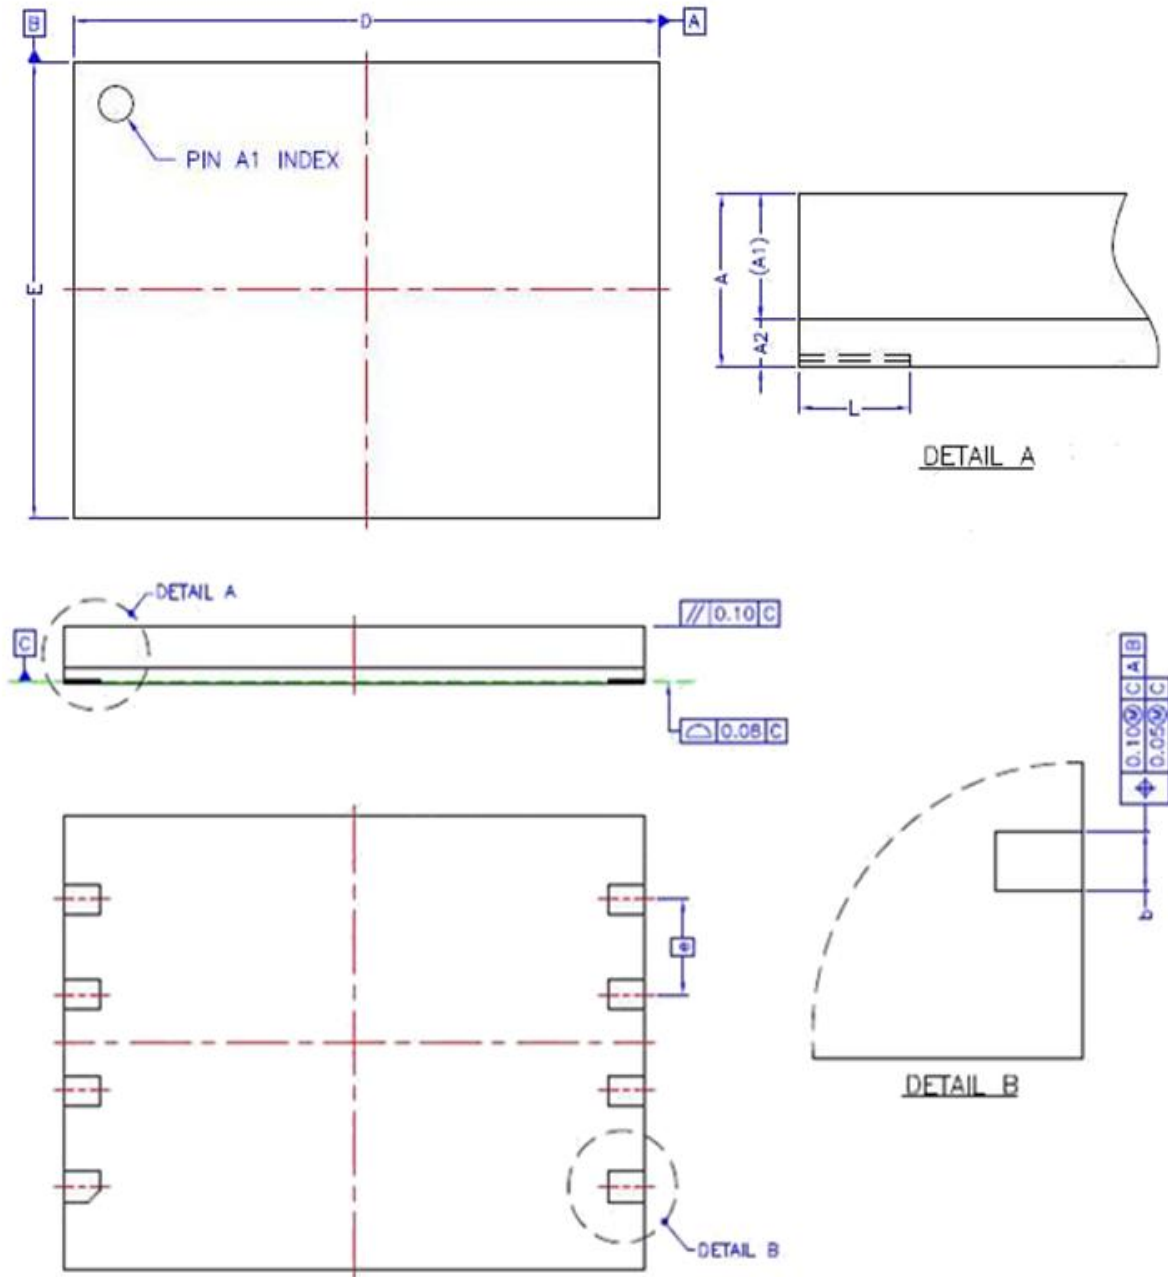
LGA (8 x 6 x 0.8mm) Package Outline Drawing Information
